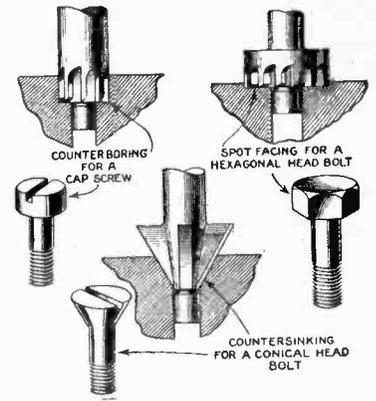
Some of the tools used in sinking bolt heads flush with the surface of the work.
